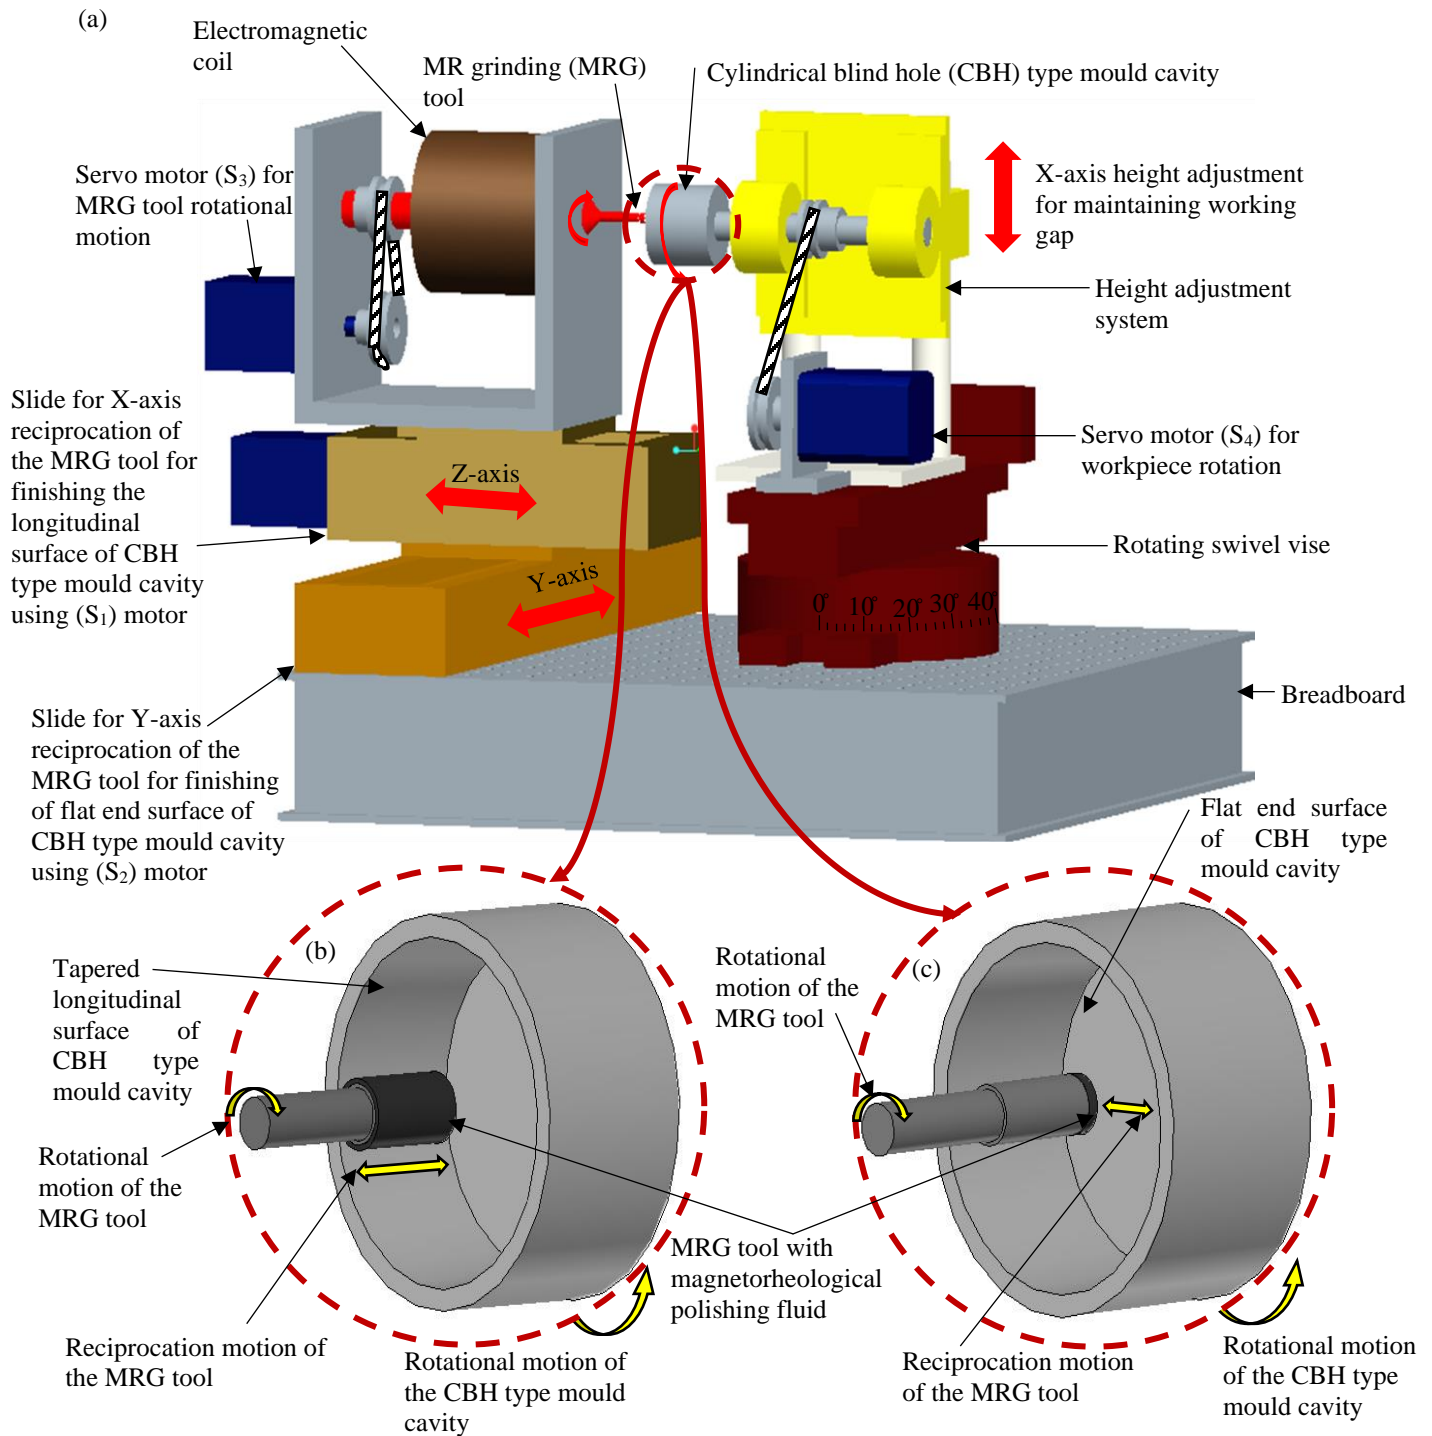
(a) CAD model of the magnetorheological grinding (MRG) experimental setup used for the finishing of typical cylindrical blind hole (CBH) type mould cavity for light covers having (b) tapered longitudinal surface, and (c) flat end surface.
